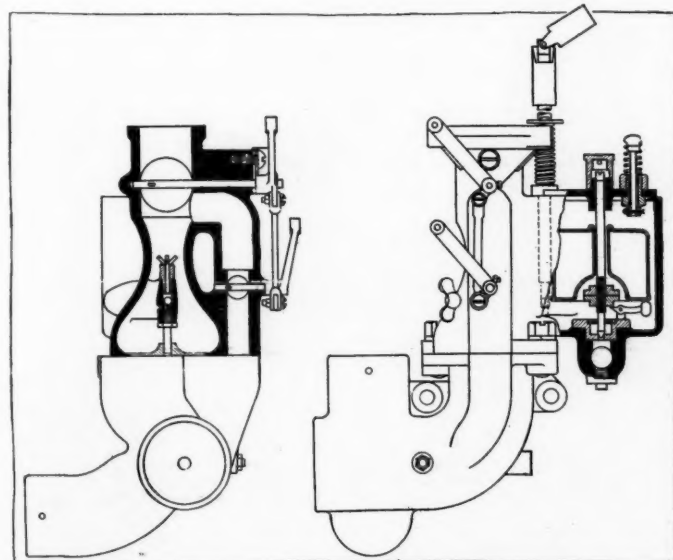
Sectional views through the carbureter used on the Franklin car. This is a Franklin product, and according to that company is a factor in securing low fuel consumption
